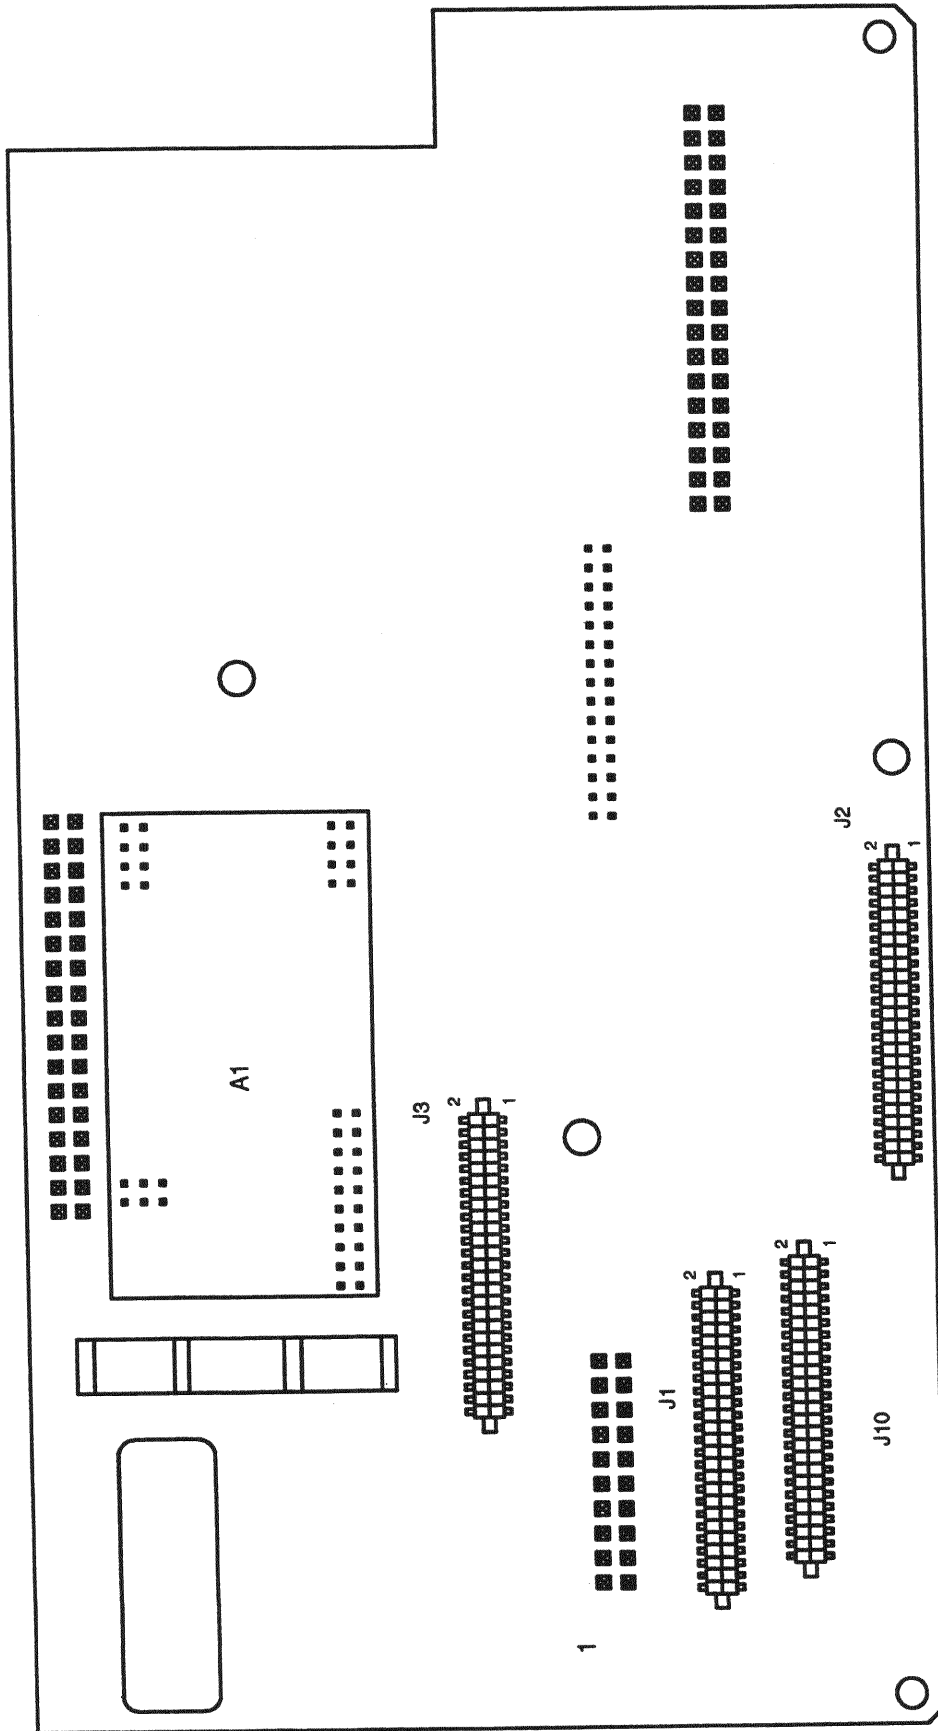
A11 Motherboard PWB Assembly Component Location Diagram
